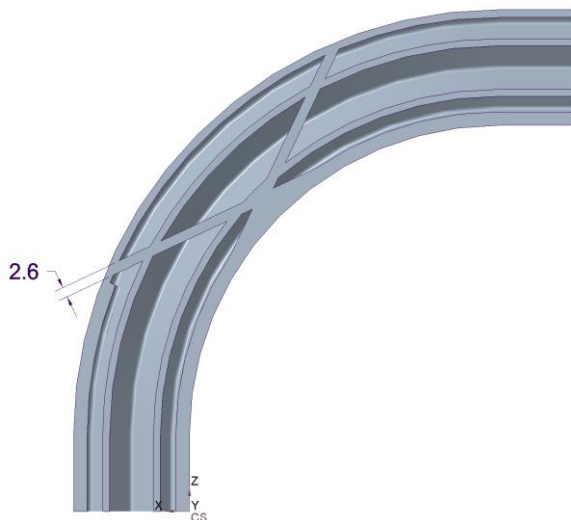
XZ-plane section at near half of the height of the curved beam, with the structural inner support just developed and with the two additional inner walls.
